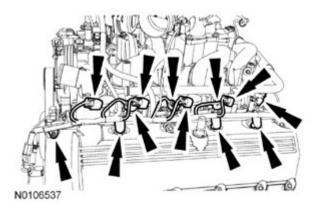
Locating Engine Control Wiring Harness Retainer On Valve Cover Stud Courtesy of FORD MOTOR CO.
